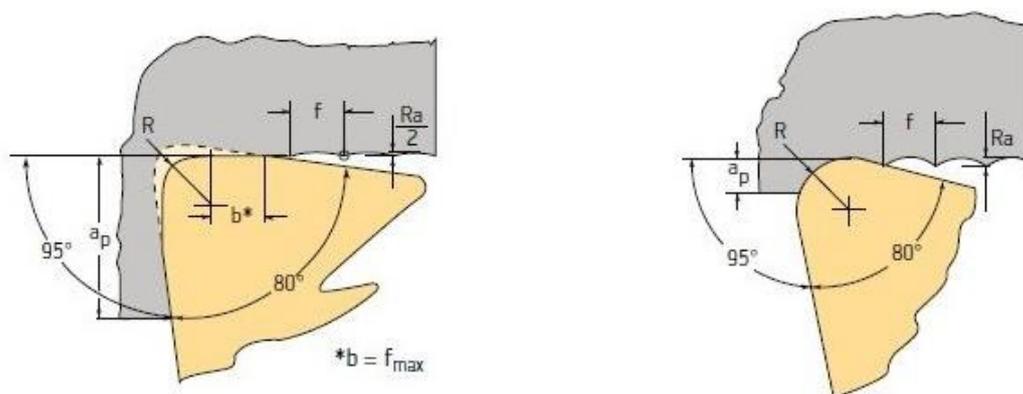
Wiper geometry vs. standard nose radius - 80° insert [13]
